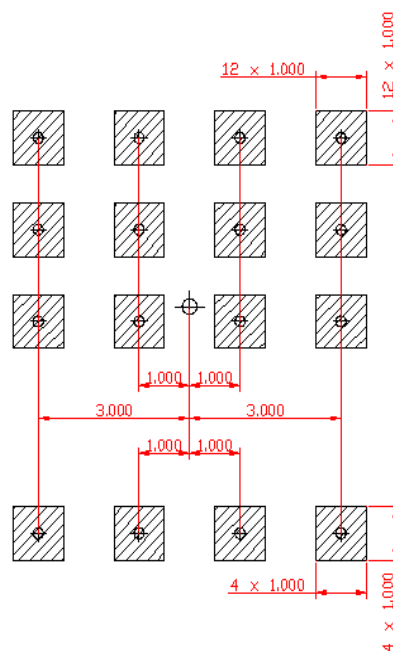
Recommended dimensions of solder paste stencil for VDSO-4
